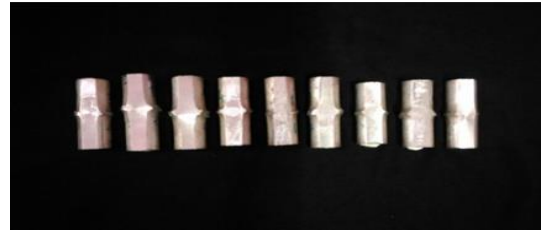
Friction Welded Specimens for Hardness Test
